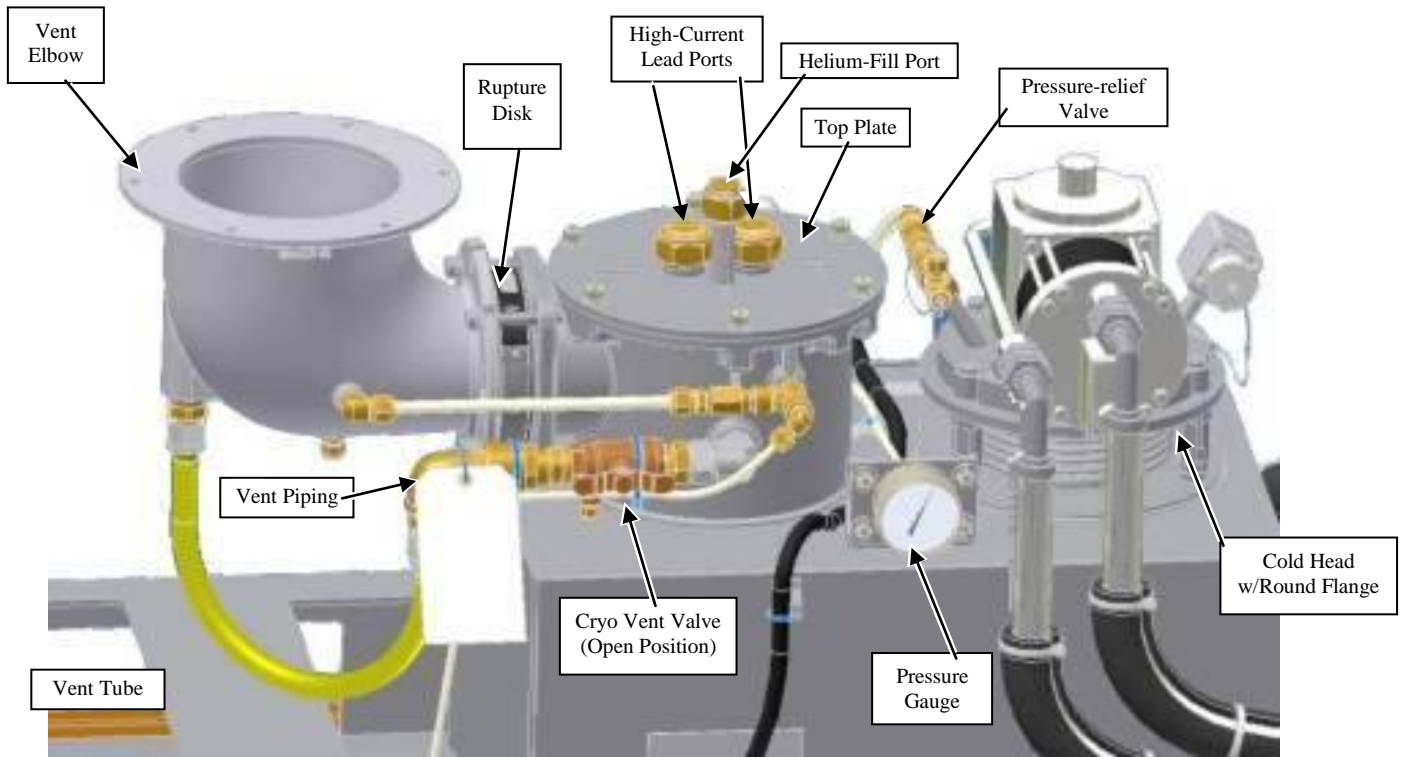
Rex Magnet Top Assembly without Integral Valve, with Rupture Disk
